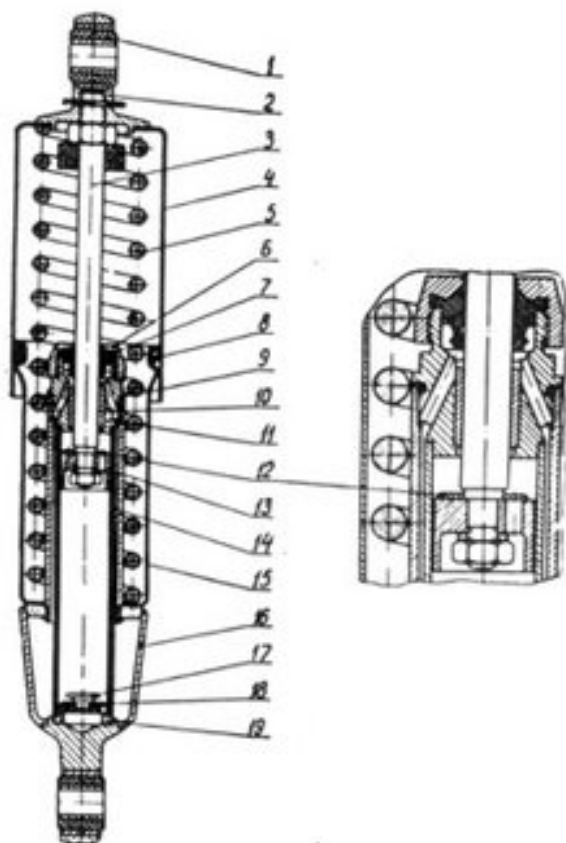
Rear wheel suspension spring hydraulic shock absorber of ИЖ-П-3, ИЖ-Ю-3 motorcycles: 1—rubber bumper; 2—upper tip; 3—rod; 4—upper barrel; 5—spring; 6—oil seal housing; 7—seal; 8—seal; 9—packing ring; 10—rod bush; 11—rod bush body; 12—valve; 13—shock absorber piston; 14—shock absorber cylinder; 15—lower barrel; 16—suspension casing; 17—lower valve retainer; 18—valve; 19—lower valve body.
